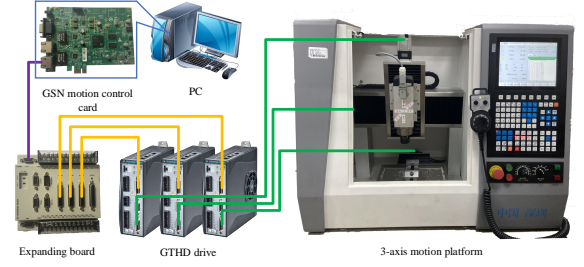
Three-axis CNC machine tool based on GSN motion control card
